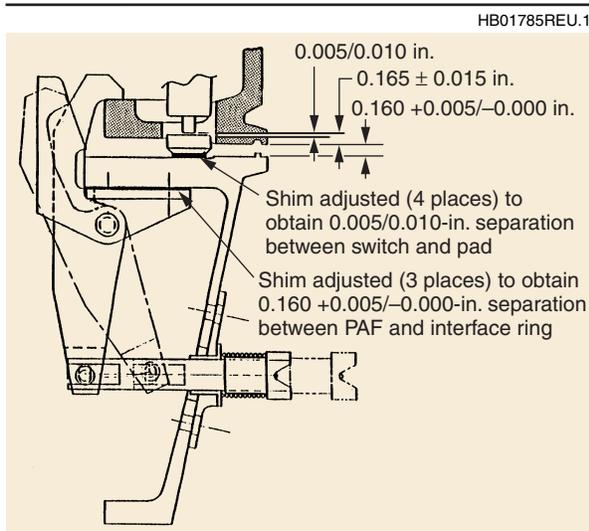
6306 PAF Separation Switch Pad Interface
